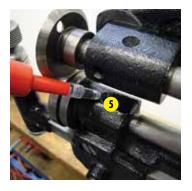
The Motorized M3 is pre-lubricated at the factory. Like any piece of precision machinery, regular cleaning and lubrication of all gears, and moving parts is recommended. Light machine oil should periodically be applied to points 1, 2, 3, 4, 5, 6 and 7. Replace worn parts as necessary.
